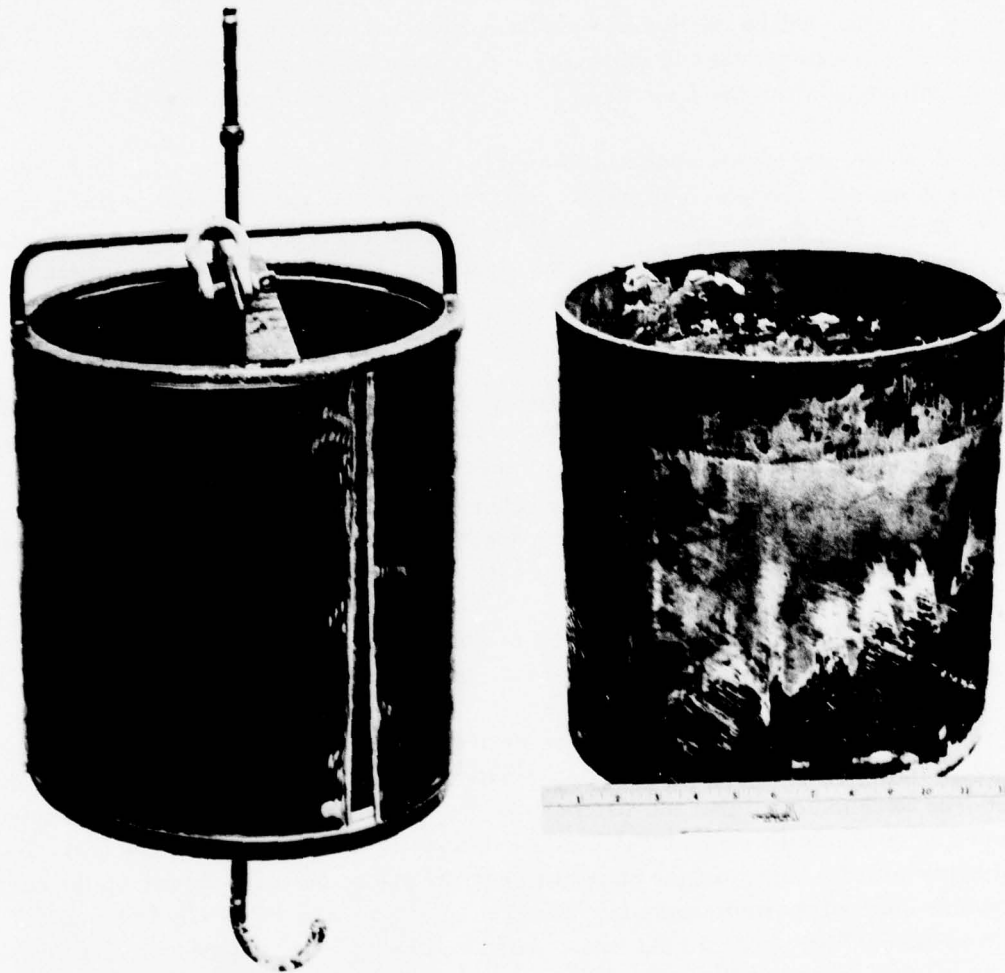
SK27378-4 Specimen Mold After Casting and as-Cast Specimen Removed From Mold.
